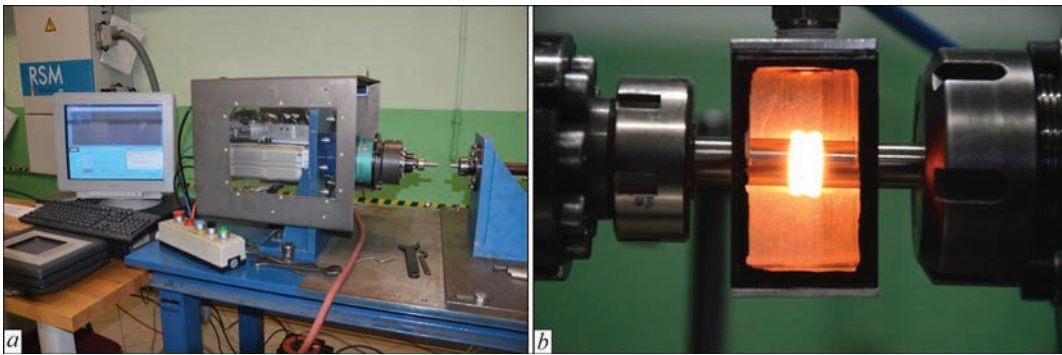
RSM400 HSFW machine: *a* — welding station with the measurement system; *b* — welding of titanium Ti64 ELI [1]
